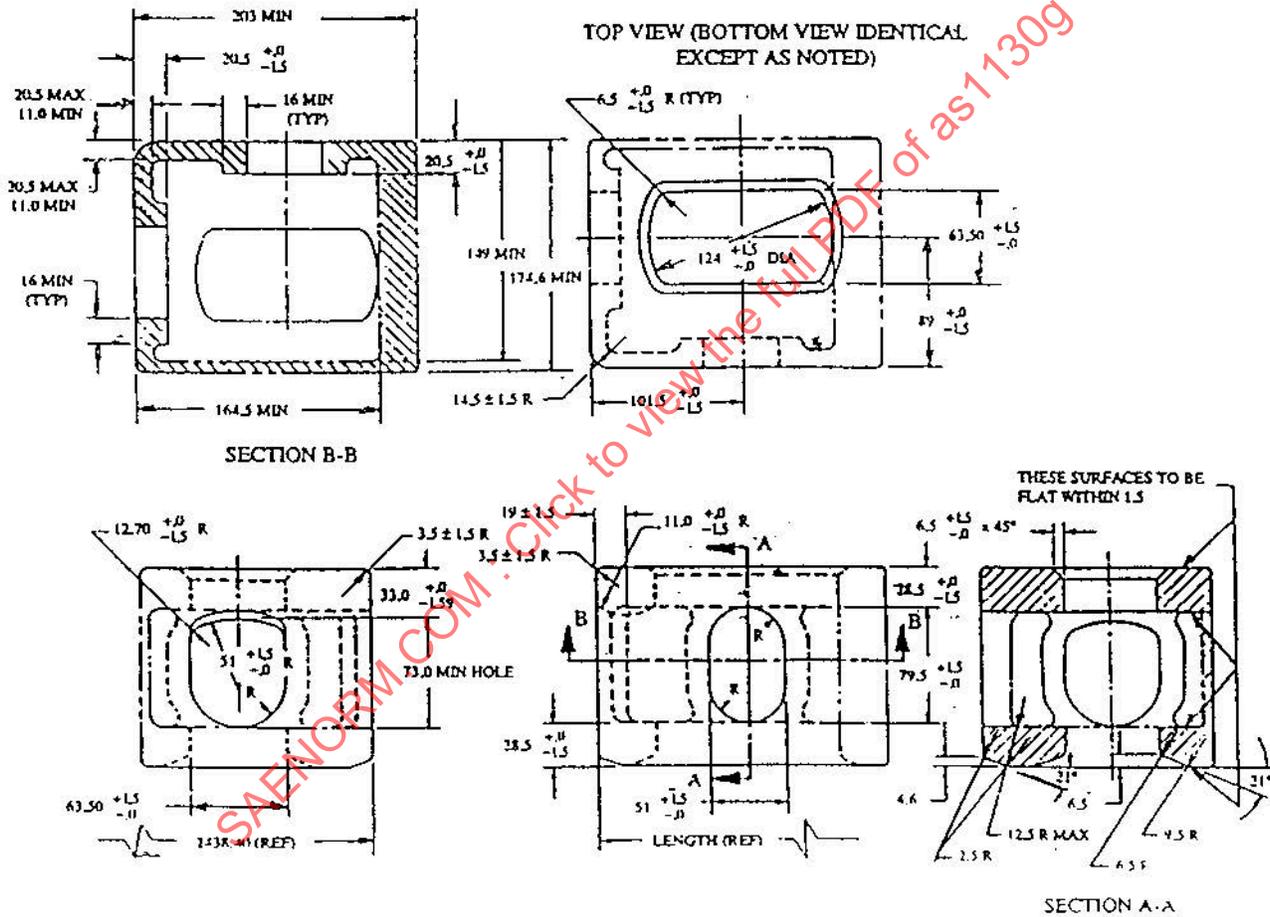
Location of Bottom Corner Fitting Type B Pallet
